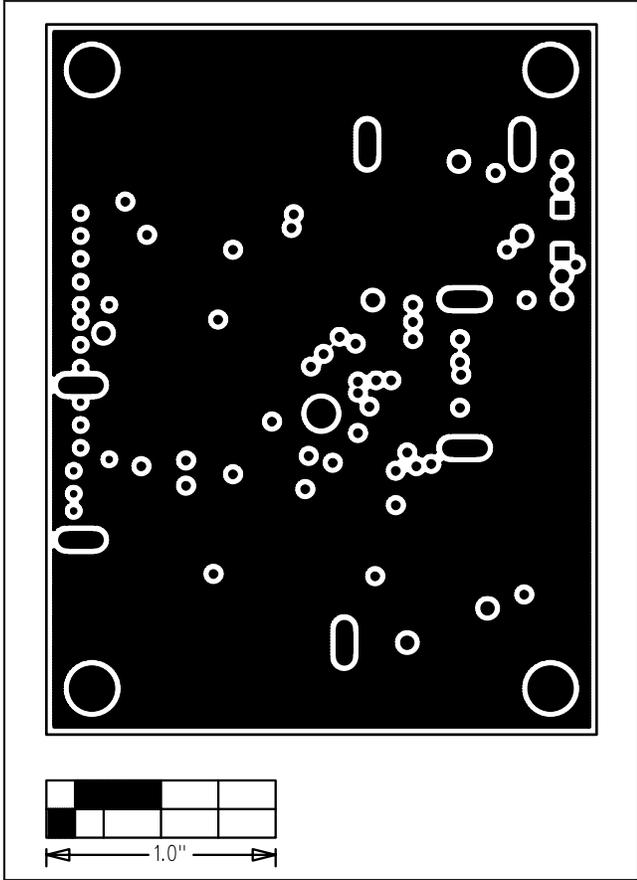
MAX17020 EV Kit PCB Layout—Layer 2 (PGND Plane)
